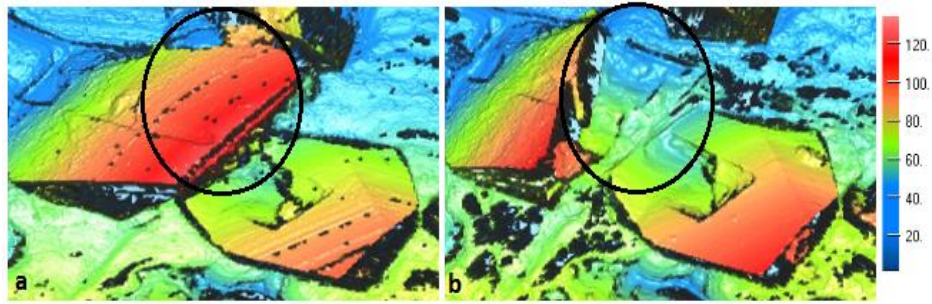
Fracture On a Single Grit; a) Initial State, b) After 150 Passes
